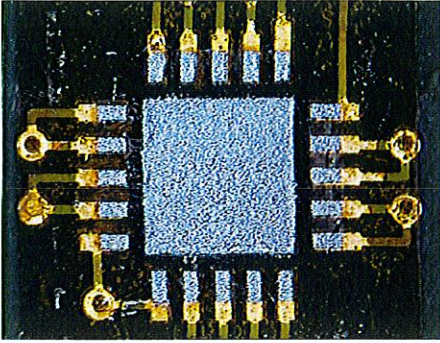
Solder Paste Applied on PCB with Polyimide Stencil
